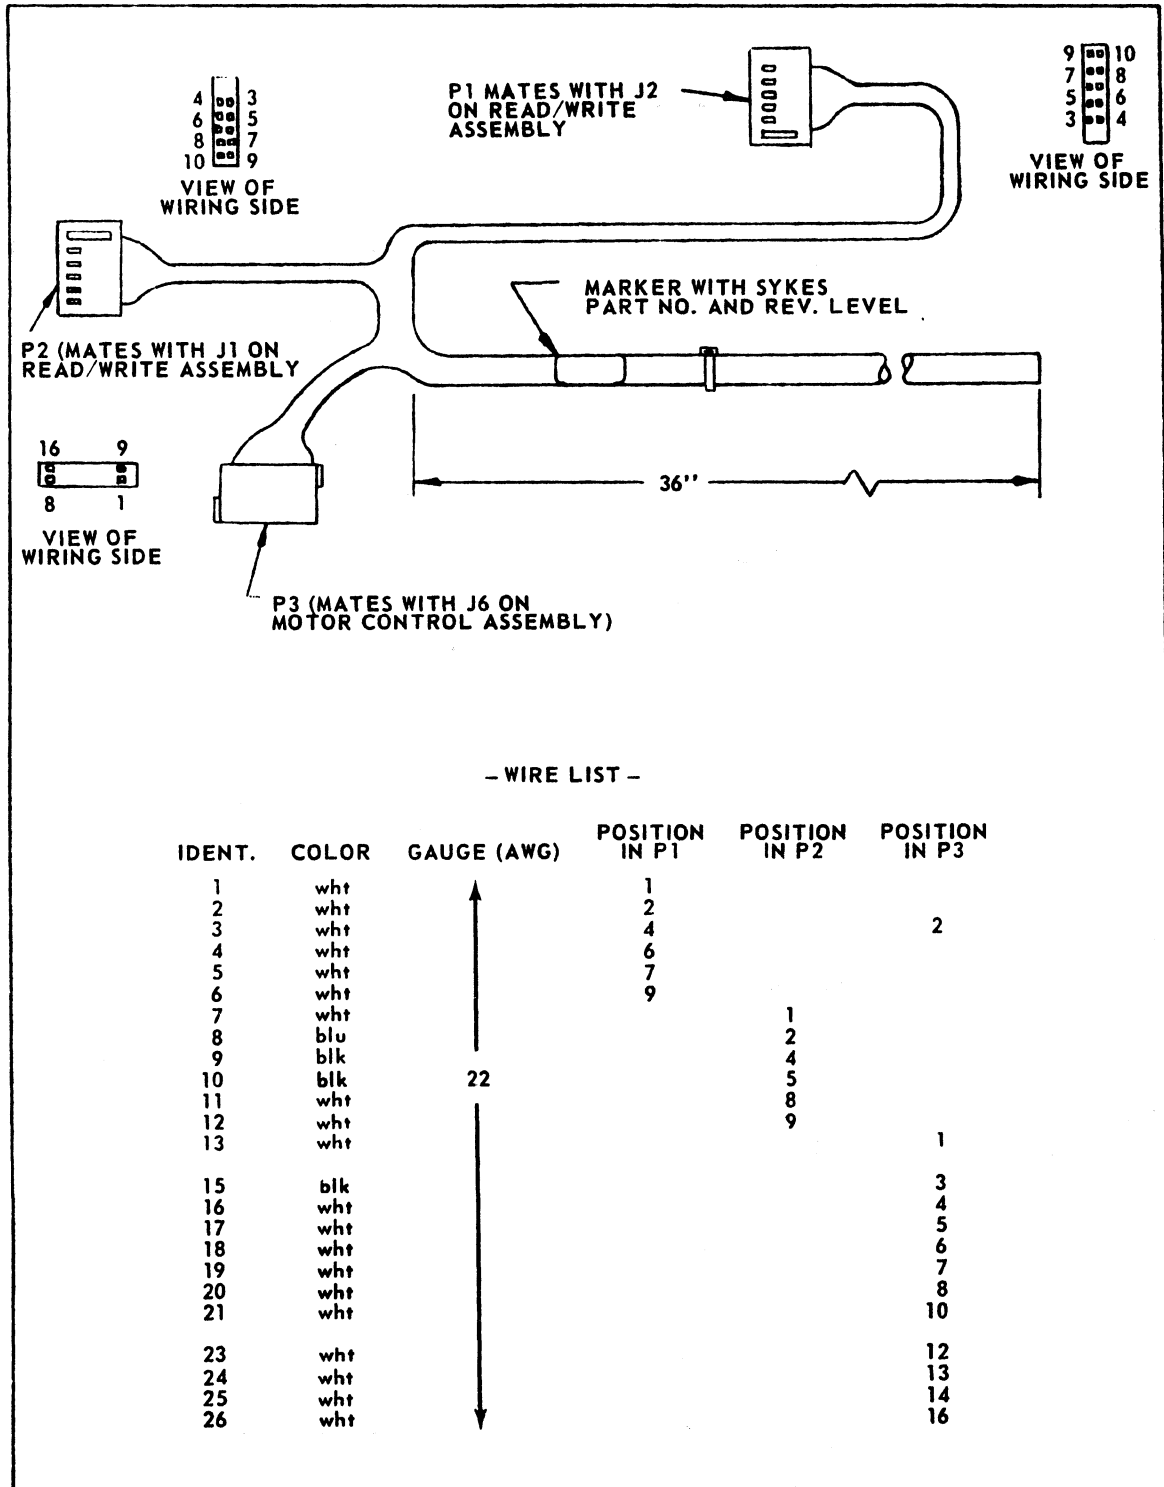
TT120 LOW LEVEL HARNESS ASSEMBLY
